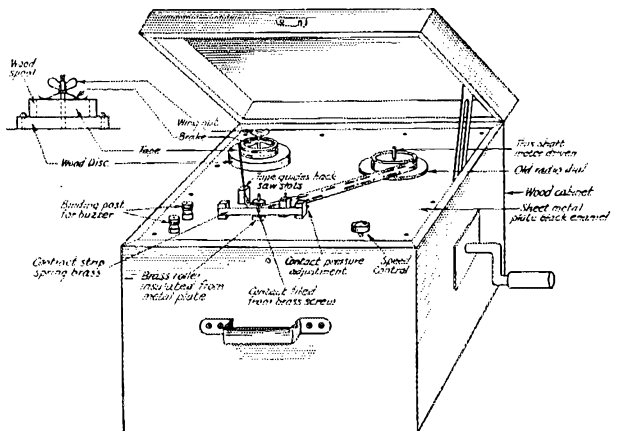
Code machine made from old phonograph spring motor and junk-box parts.
